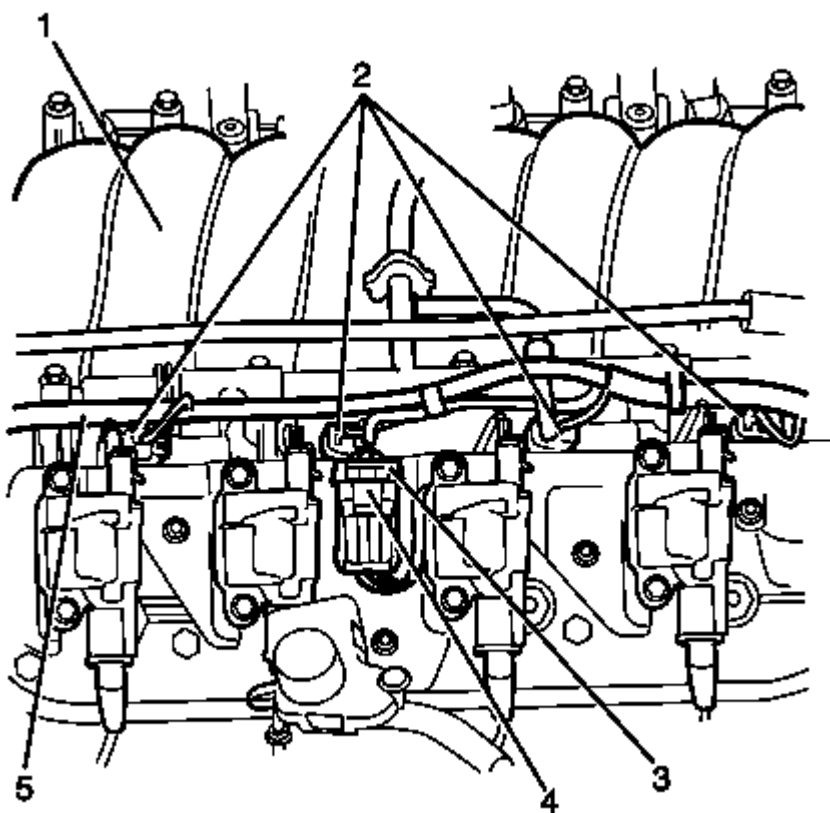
Identifying Left Side Fuel Injector Wiring Harness Connectors
